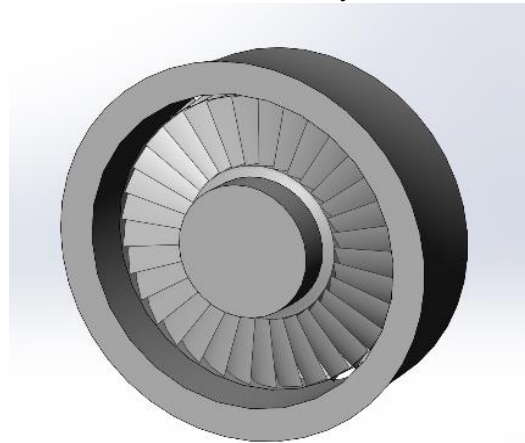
SolidWorks CAD model of 1st stage high-pressure compressor [1]
